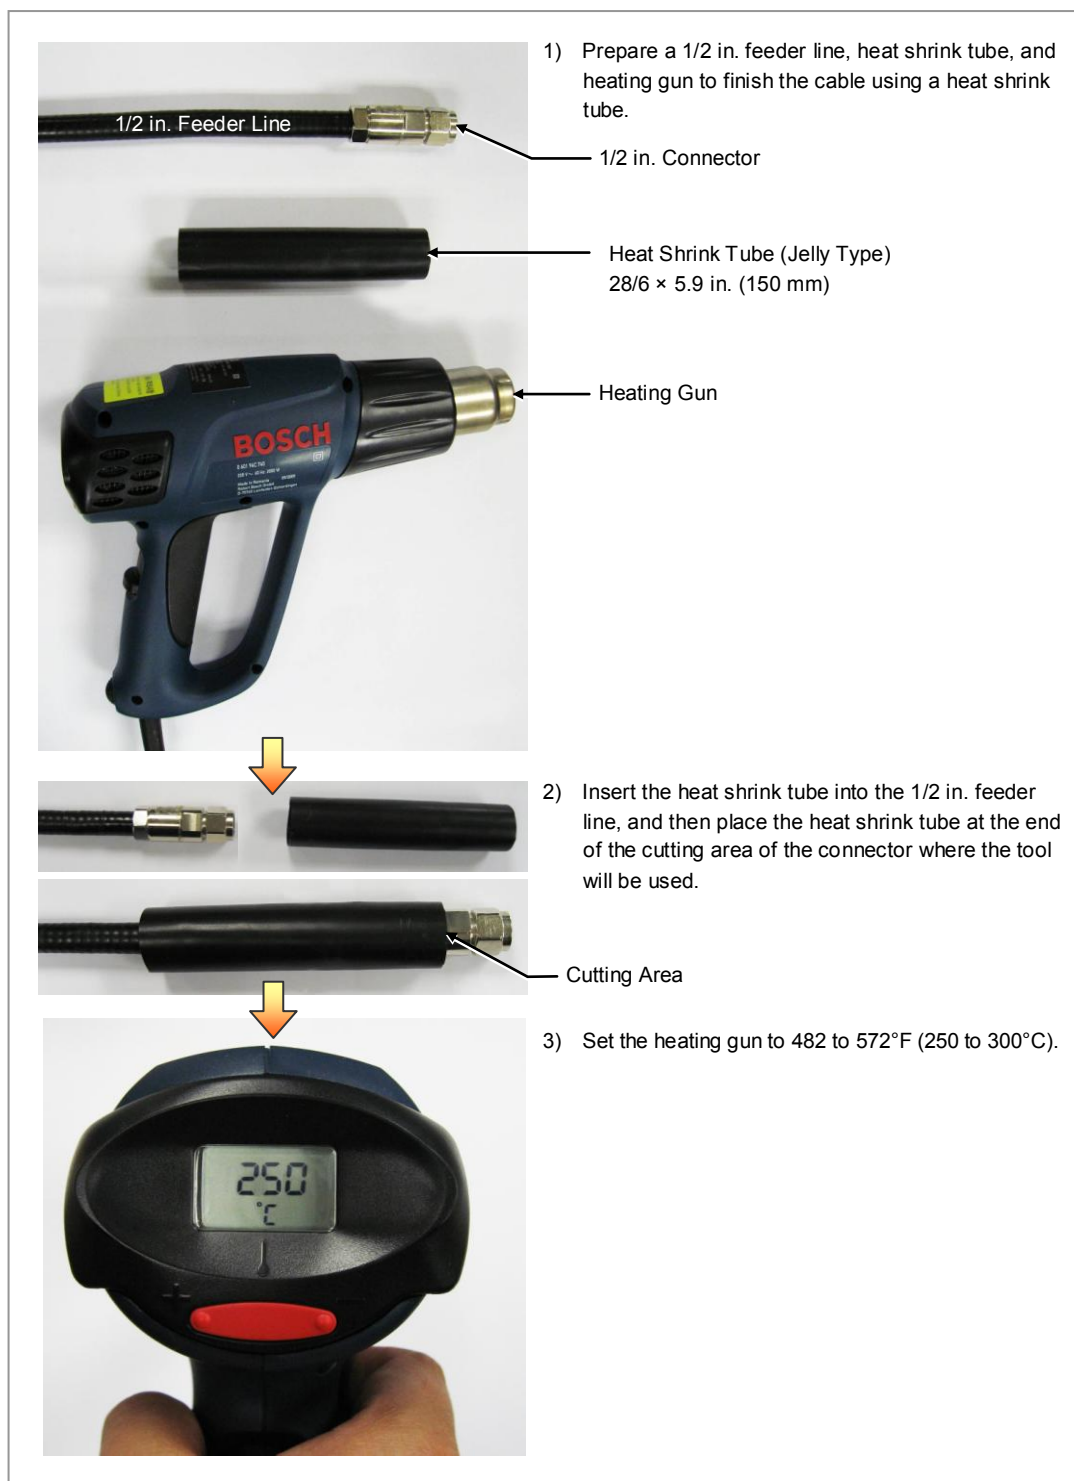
Shrink the Heat Shrink Tube\_Feeder Line (1)
